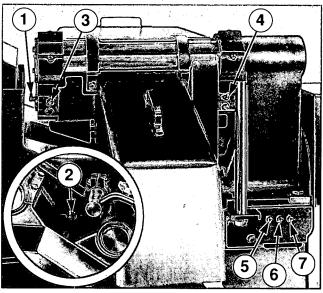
Grease fittings numbered 1 and 2 are for each end of the crosscut knife spindle shaft, 3 and 4 are for the circular knife spindle, and 5, 6 and 7 are for the main bearings.
